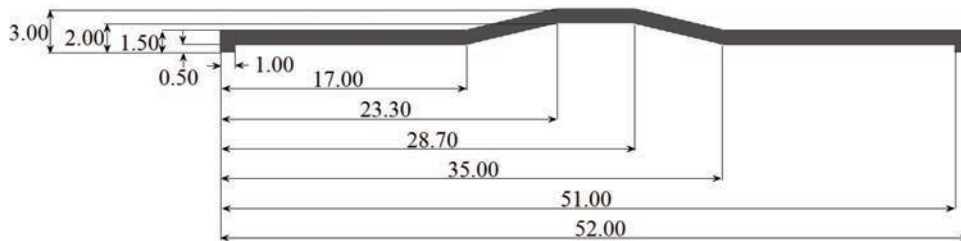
Schematic of the transducer end-cap, where the dimensions are in millimeters.
